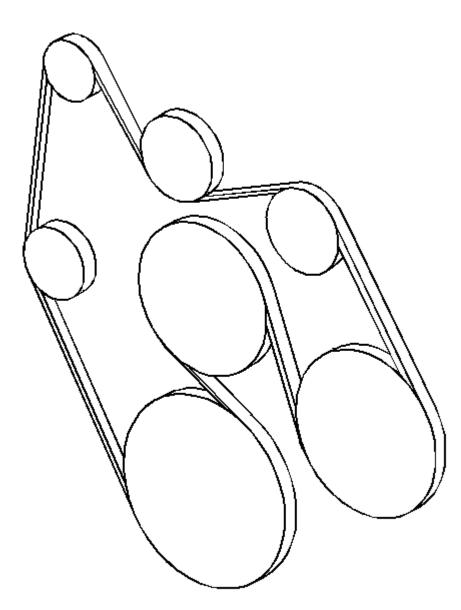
View Of Drive Belt Routing (W/Air Conditioning) Courtesy of GENERAL MOTORS CORP.
